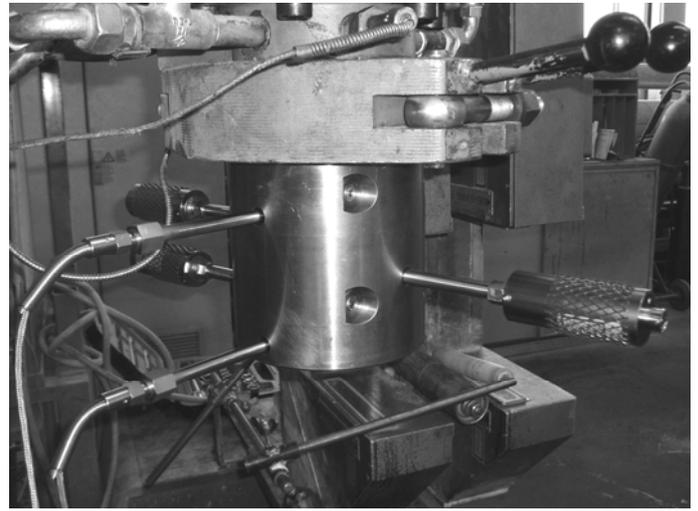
Mounted extrusion tool with three pressure transducers and two temperature sensors.
